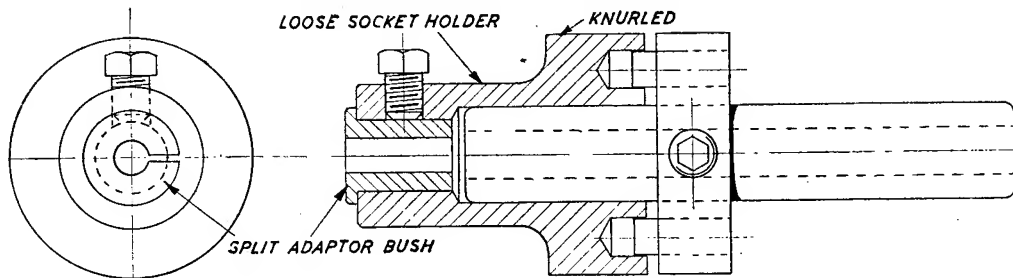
Slip tap holder, with socket for split adaptors, to fit same type of capstan-head holder as Fig. 23.
